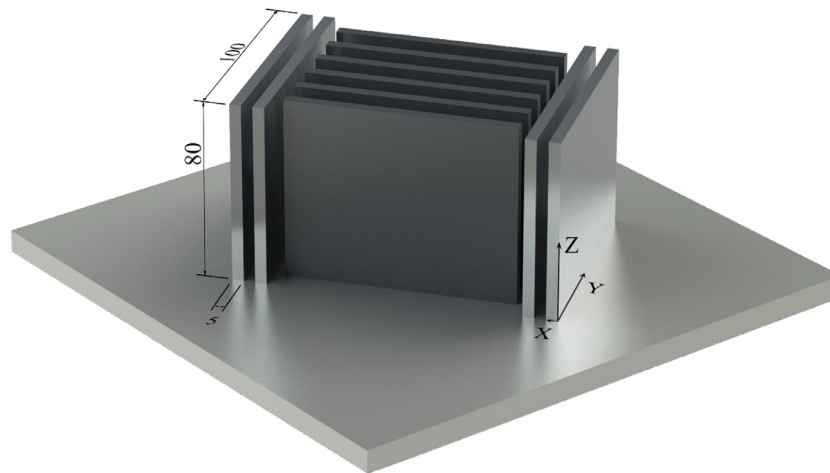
Position and dimension of the AlSi10Mg plates on the built platform during AM.
